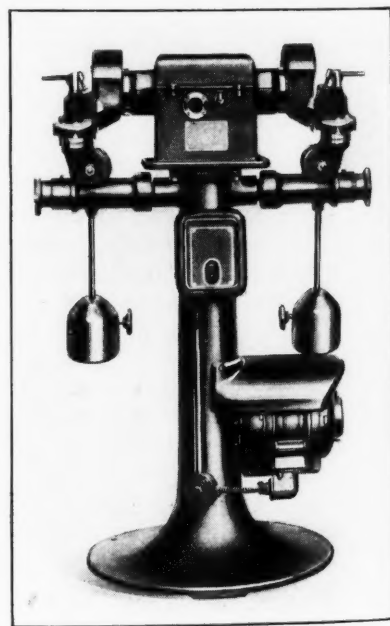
Grinder for Sharpening Gleason Generator Tools
